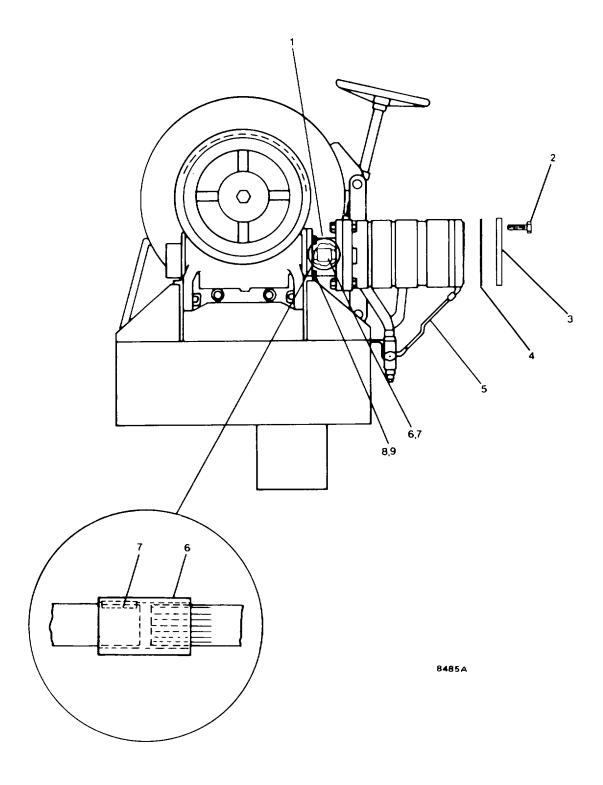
Bow Anchor Windlass Drive Components.
